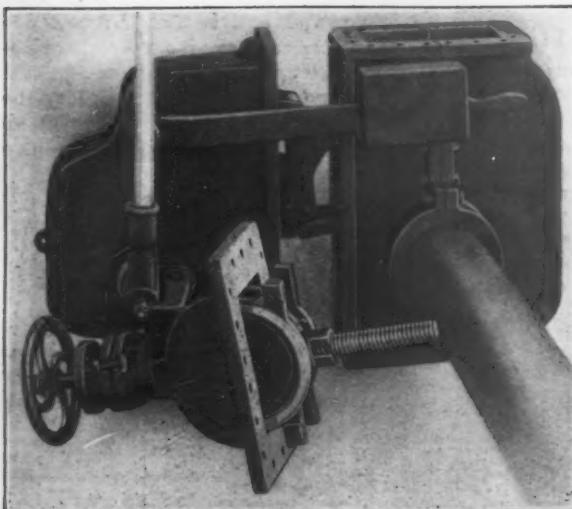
The Hoefer Valve Inserting Machine Partly Applied to the Pipe to Be Cut.
